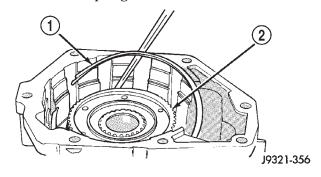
Overdrive Clutch Reaction Snap Ring Removal/Installation
